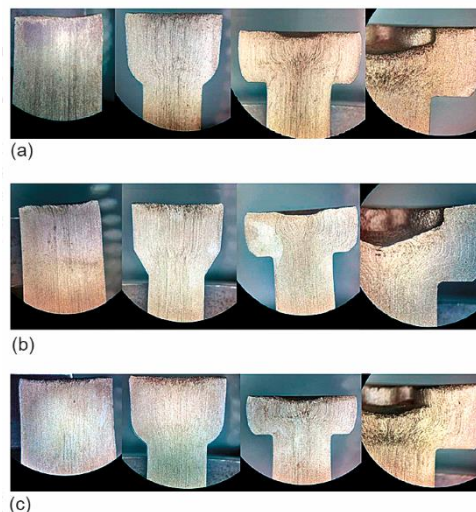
Macro images of extrusion samples produced according to different extrusion molds
